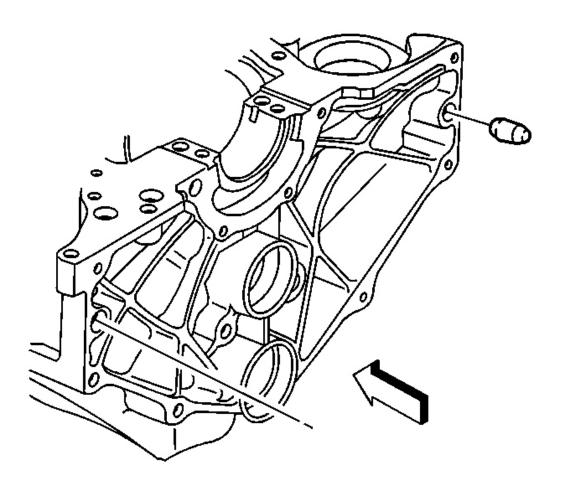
Identifying Transmission Locator Dowel Straight Pin Courtesy of GENERAL MOTORS CORP.
